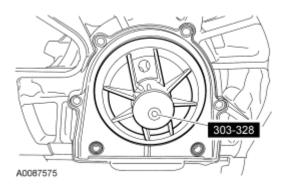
Positioning Crankshaft Rear Oil Seal Using Special Tool (303-328) Courtesy of FORD MOTOR CO.
